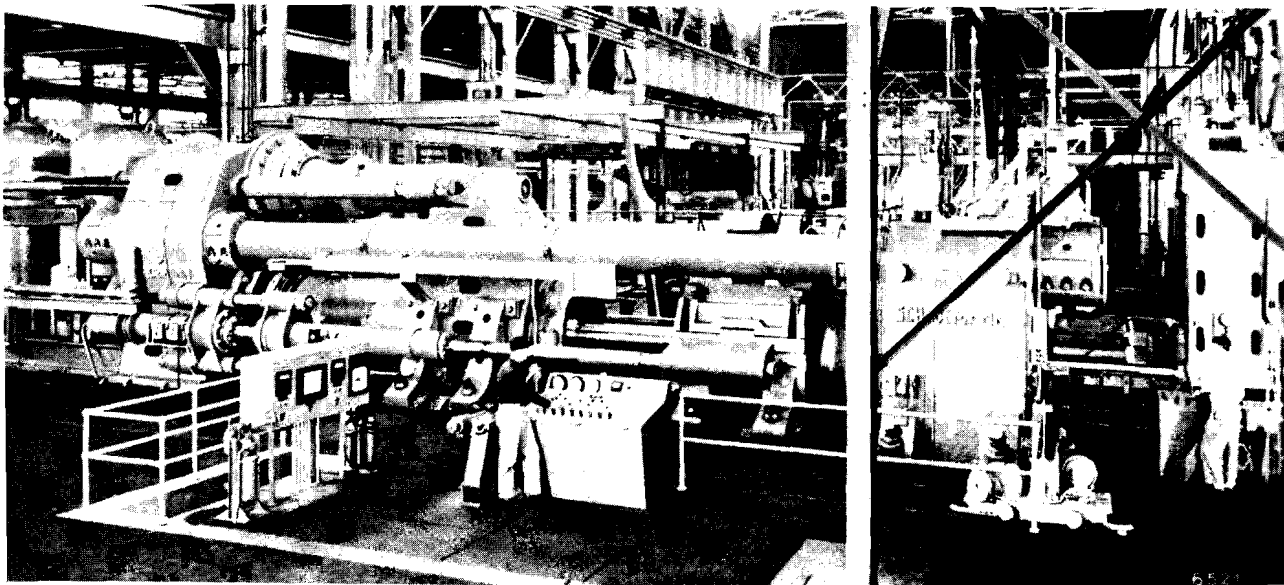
HOT EXTRUSION SETUP USING GLASS LUBRICATION
